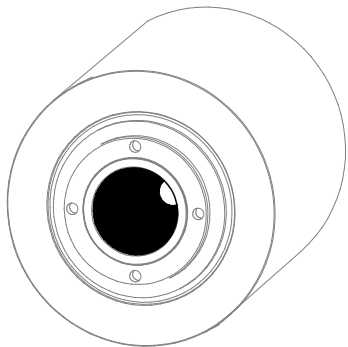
3. Conical surface of the ISO spindle shaft (highlighted in black)
